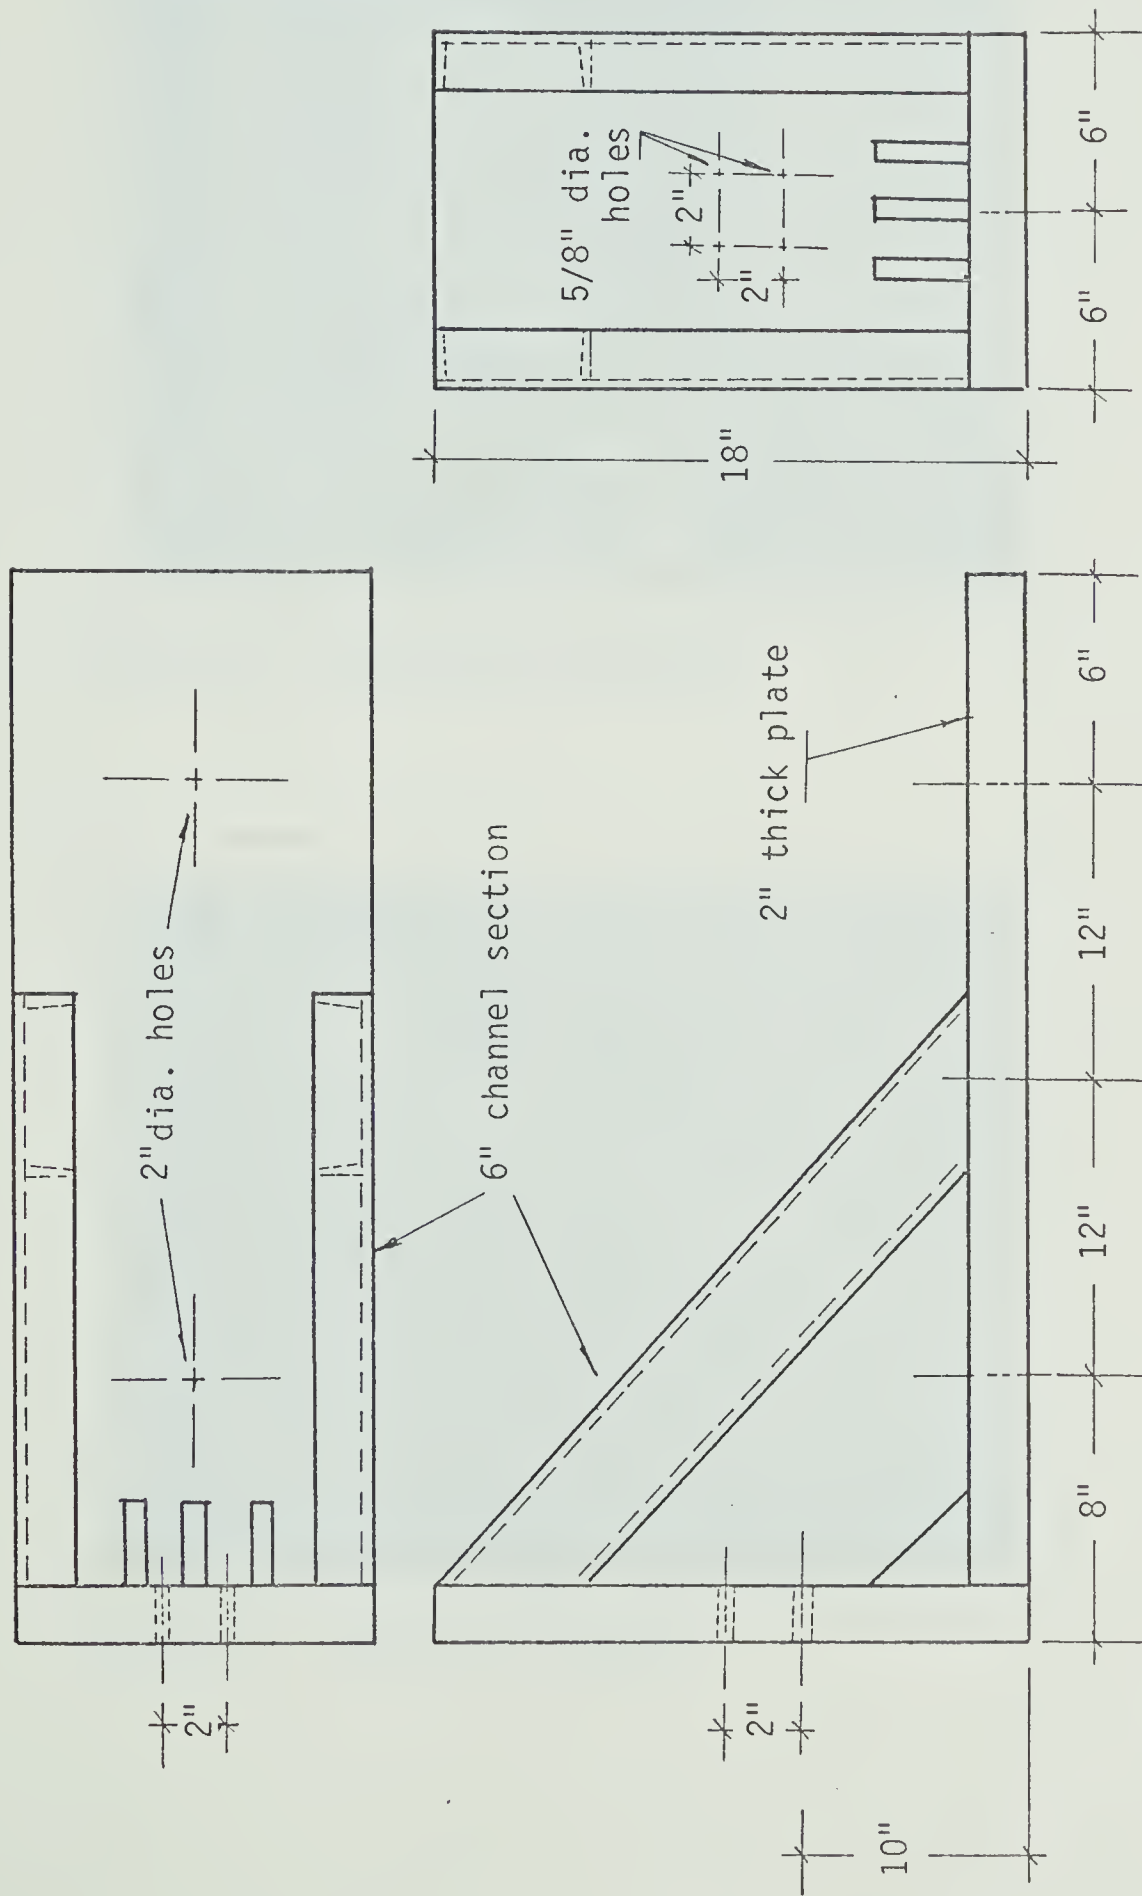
ALL STEEL PRESTRESSING ABUTMENTS
